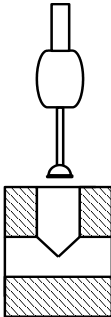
Move tool inside the hole to a depth close to the intersection.
